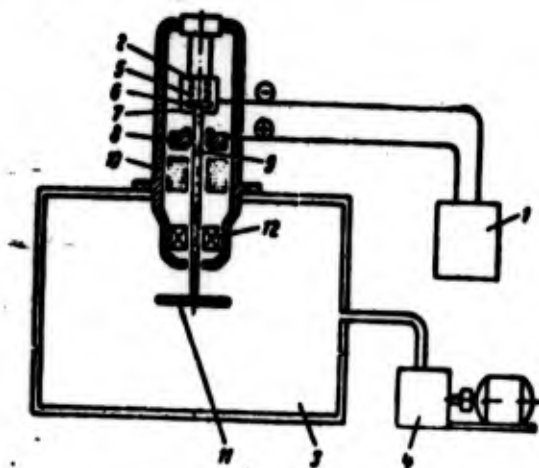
Diagram of electron-beam welding: 1 - rectifier; 2 - electron gun; 3 - vacuum chamber; 4 - vacuum pump; 5 - heater; 6 - cathode; 7 - cathodic electrode; 8 - anode; 9 - electron beam; 10 - magnetic lens; 11 - parts to be welded; 12 - controlling magnetic coils.
